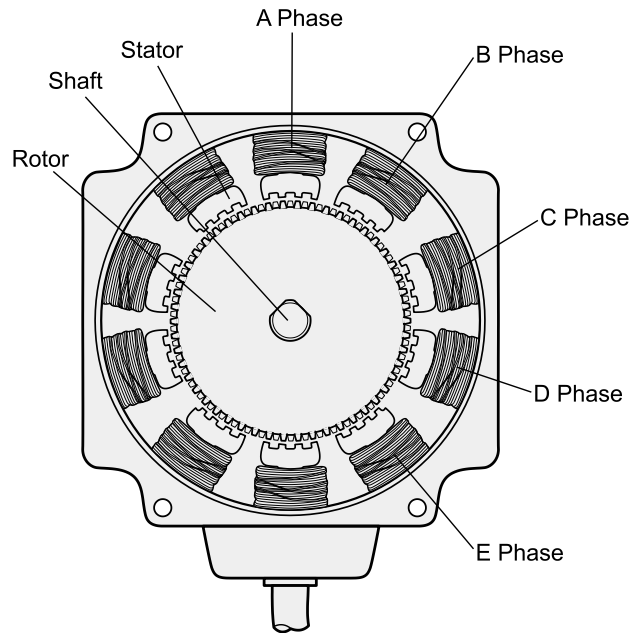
5 Phase Stepping Motor Cross-Section Perpendicular to Shaft
